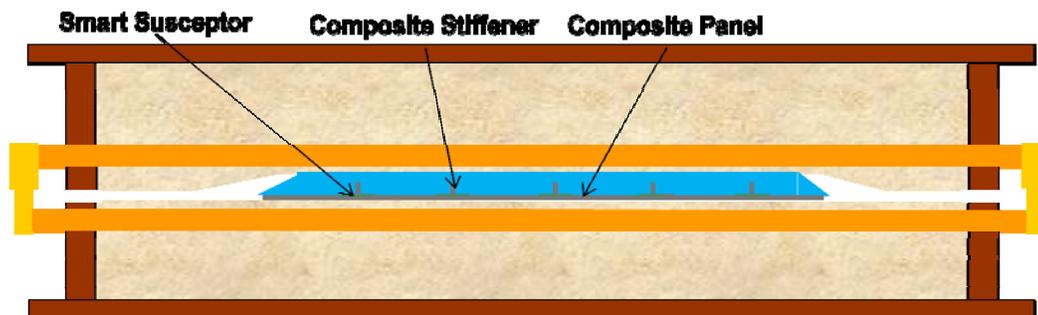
Depiction of the elastomeric caul holding the T stiffeners to the flat panel via pressure from the ceramic-tool/press during the welding process
